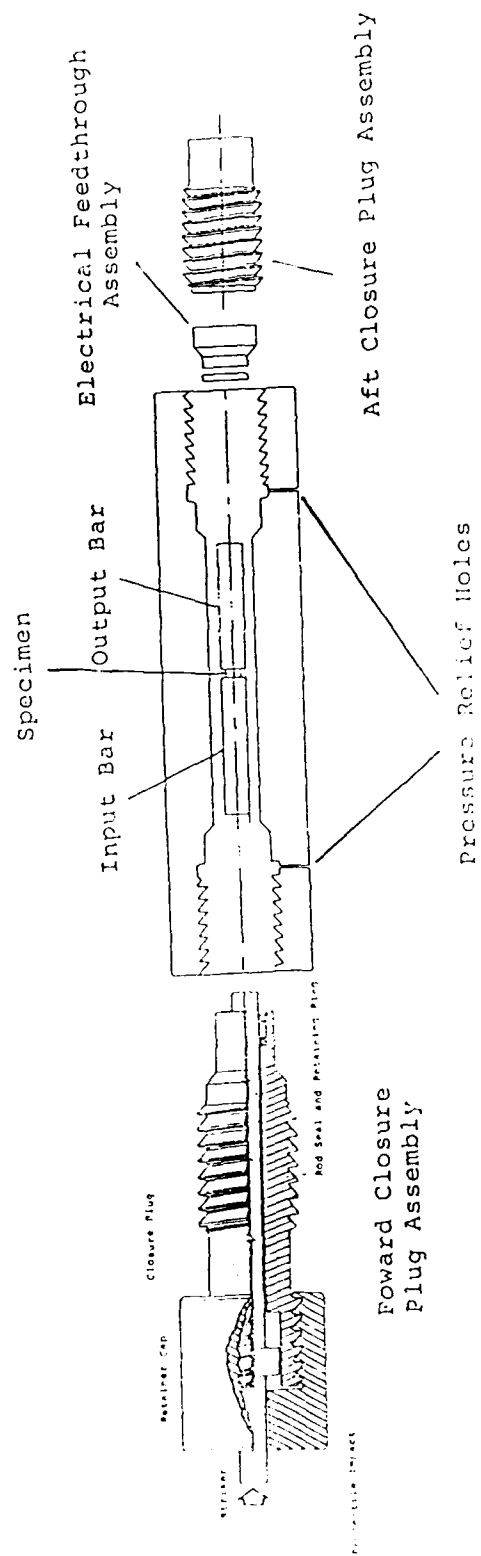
High-Pressure HSPB Vessel Component Assembly.
